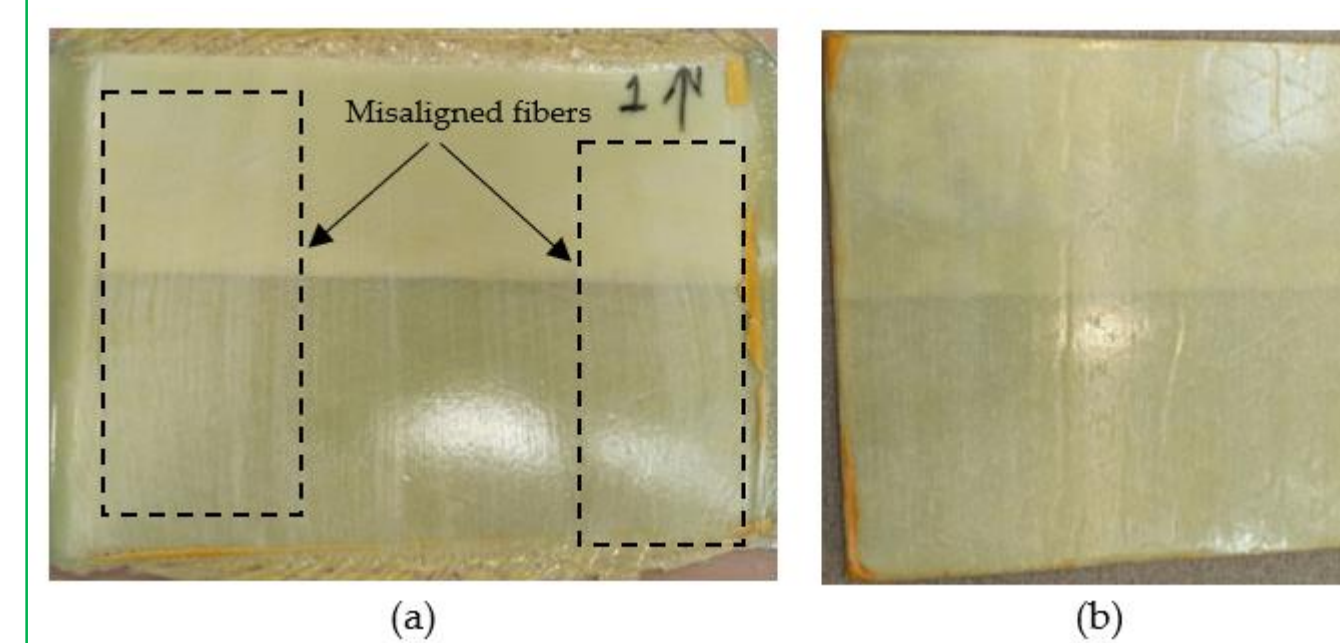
Composite laminate fabricated by press molding (a) without frame (b) with frame support
